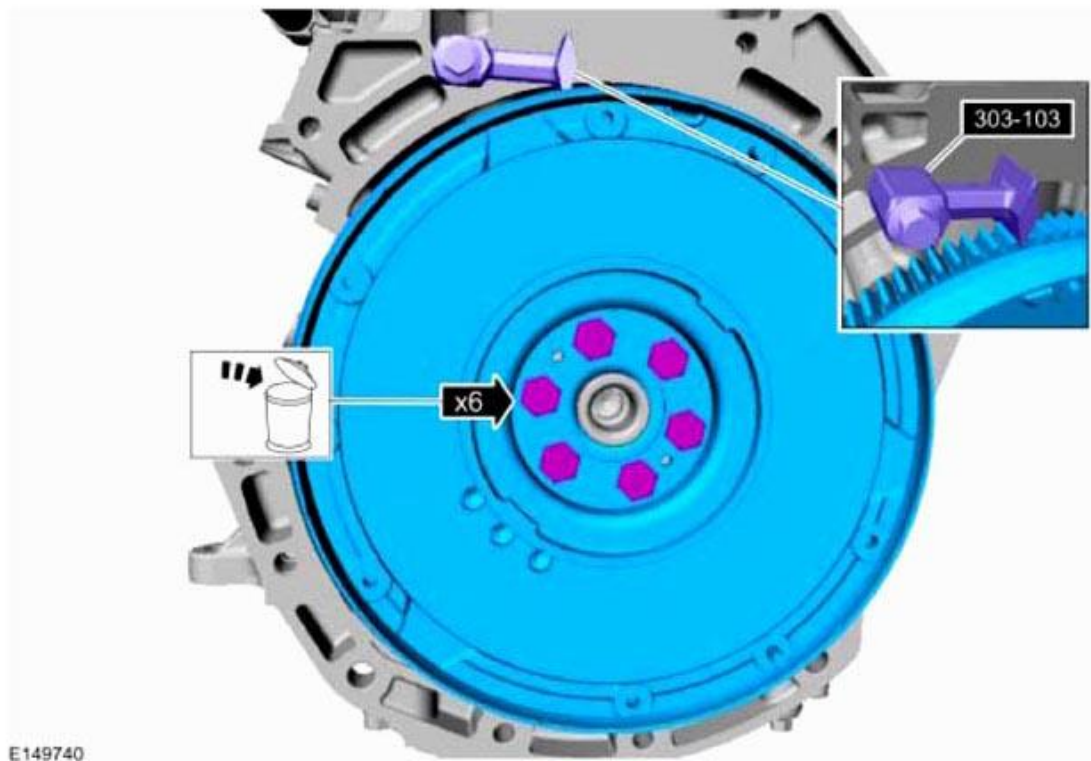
Identifying 303-103 Flywheel Holding Tool And Flywheel Bolts
